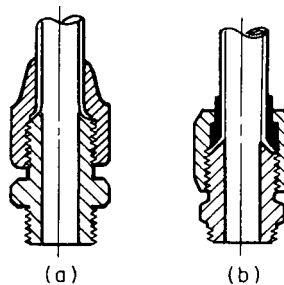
Flared tube fittings. (a) A 45° flared fitting; (b) triple-lok flared fitting. (Parker-Hannafin Co.)
